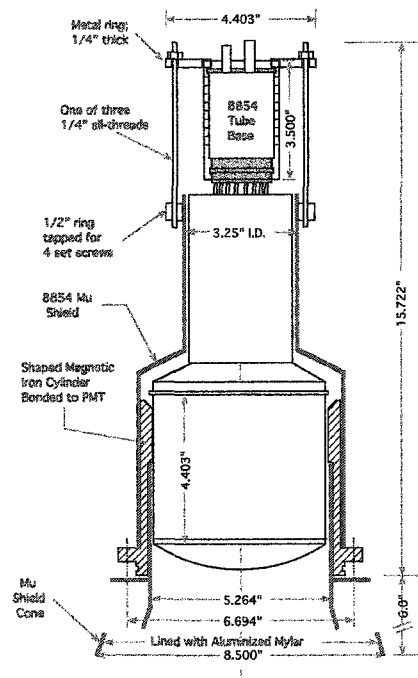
Burle 8854 phototube with mu shielding and collar assembly as used on the E871 Čerenkov counter
